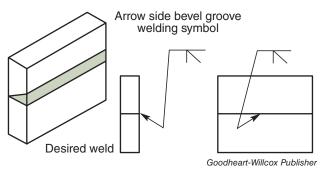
The arrow for a bevel or J-groove weld uses a bent leader. The arrow head points to the particular section to be machined.
